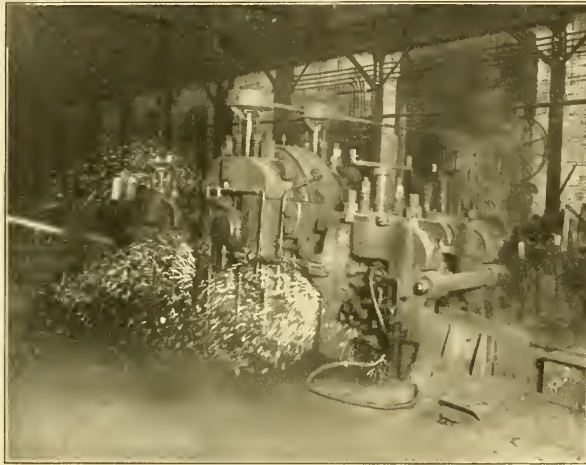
HOT SAWING OR MILLING MACHINE IN OPERATION
